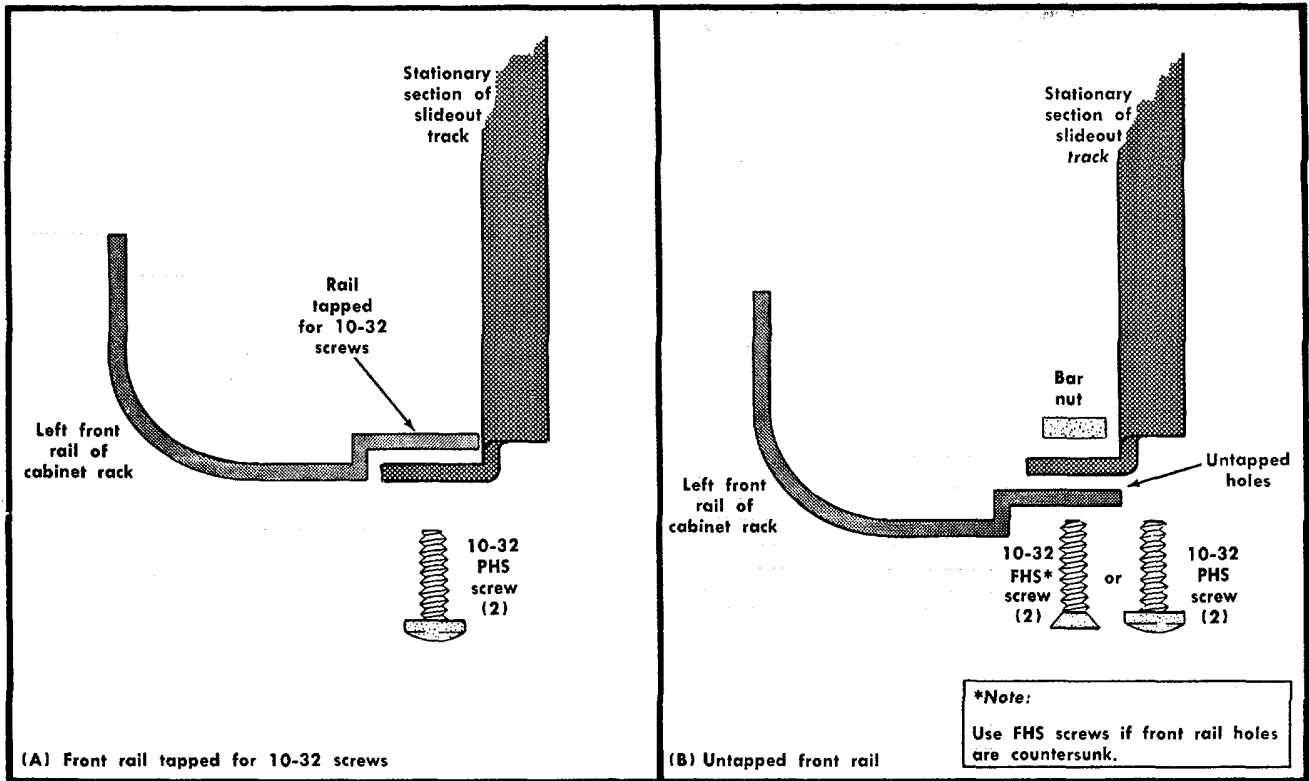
Methods of mounting the stationary section to the front rails.
